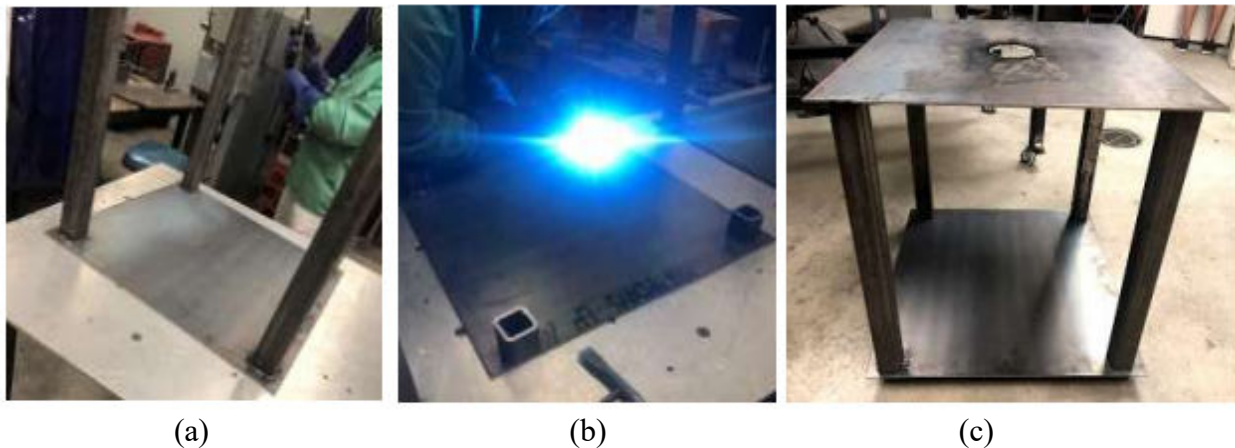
Welding procedures: legs to the bottom of the top plate (a); stubs to the bottom of the top plate (b) top and bottom plates together via legs (c)
